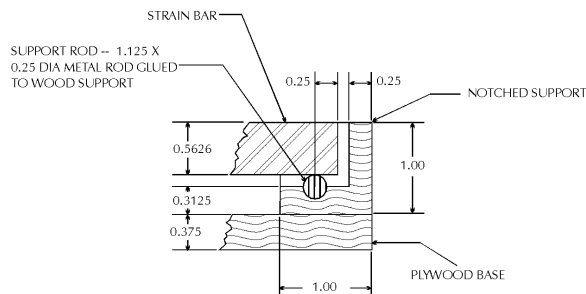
Cross-section of Strain Gage-Notched Support Interface (all dimensions in inches)
